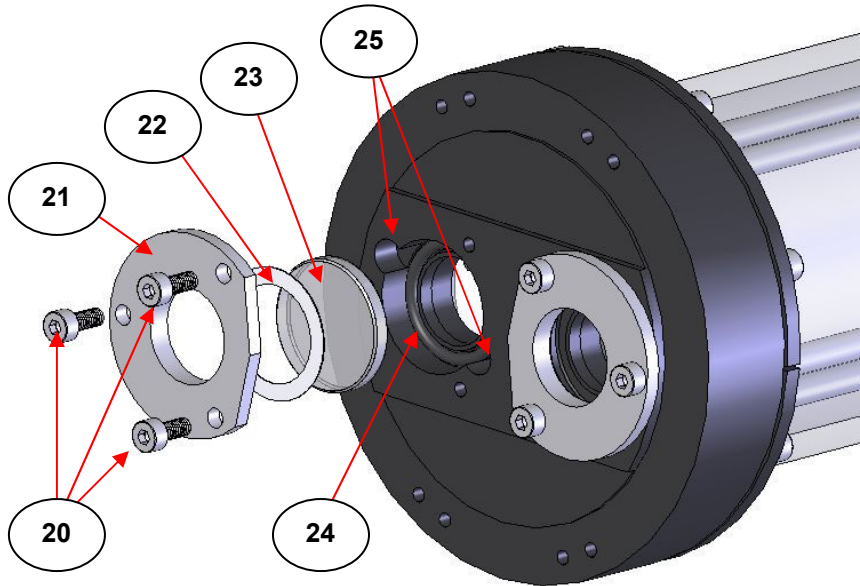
Window Assembly of Parts Separated at the Base of the Tornado™ T5 Gas Cell
